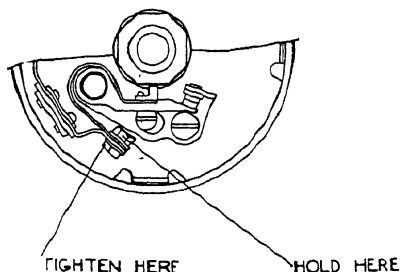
WHEN FITTING NEW CONTACT ARM
